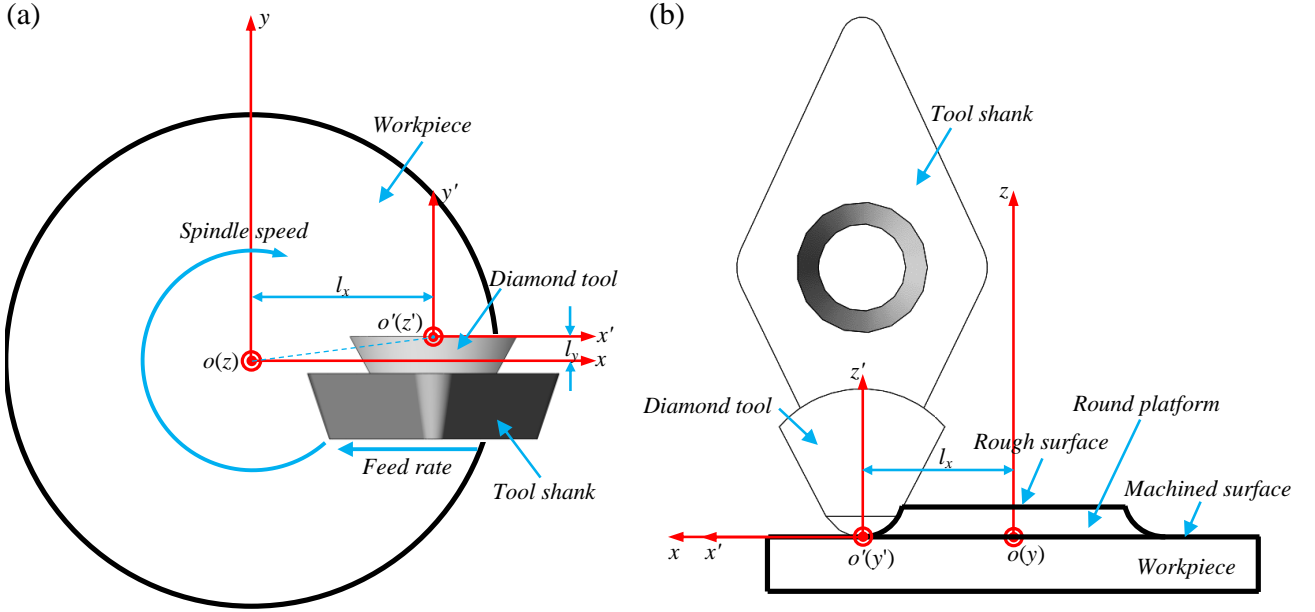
Schematic of (a) tool-workpiece motion with centre error and (b) workpiece material removal process
